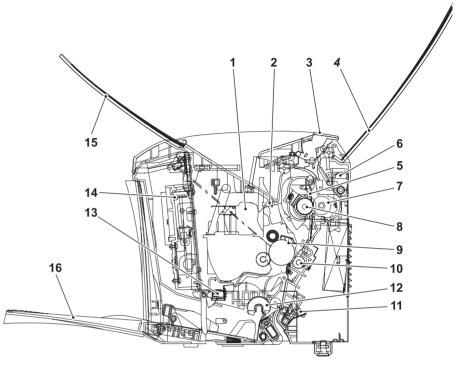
Sectional View of Mechanism (EPL-5900L)
